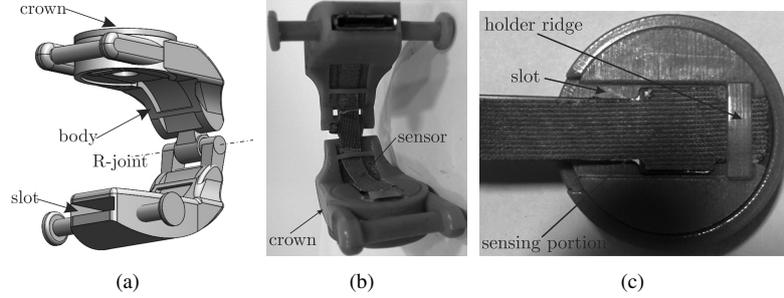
Pulse-Watch and sensor. (a) CAD model showing various parts, (b) sensor assembled into the device, (c) sensor and crown assembly.
